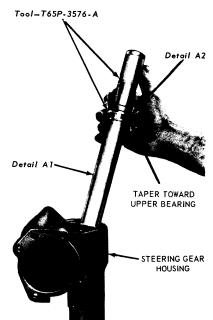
Removing Steering Gear Housing Upper and Lower Bushings
